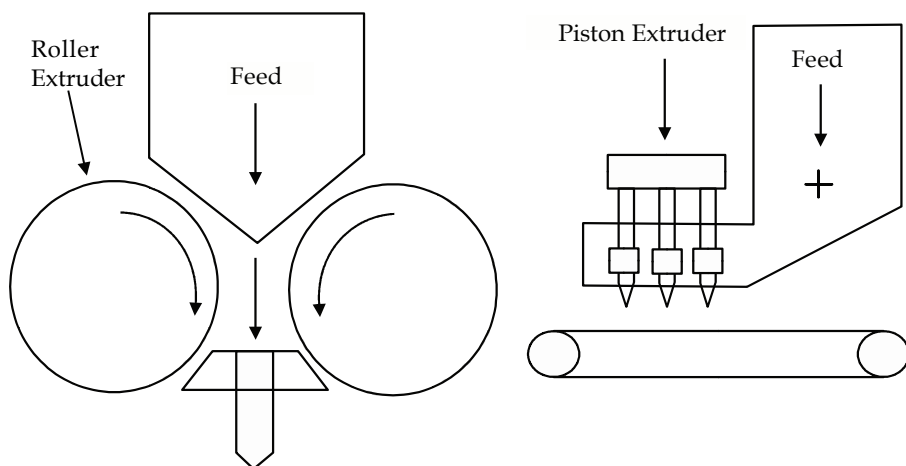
Roller extruder and Piston extruder representation (Dziezak JD, 1989)
